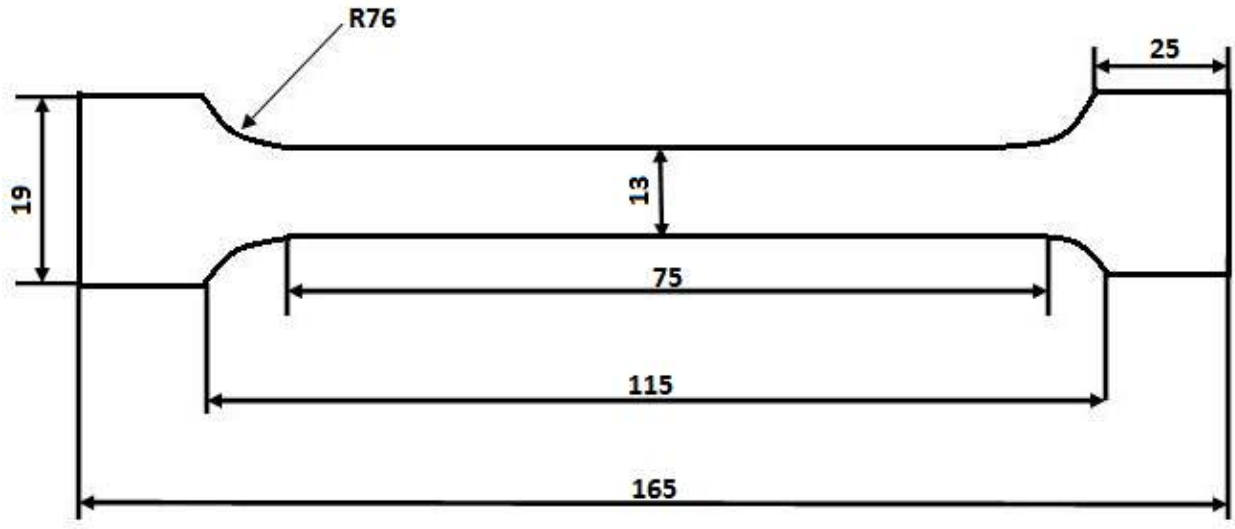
Dimensions of dog bone shaped tensile specimen as per ASTM D-638 standard in mm
